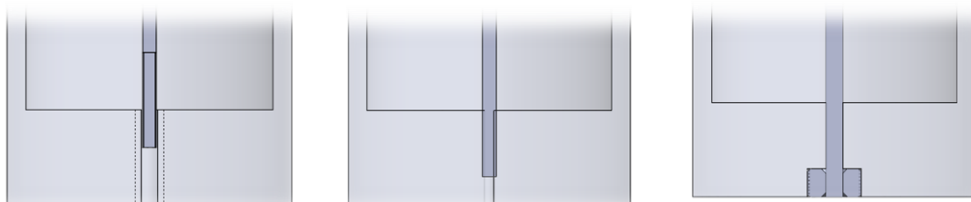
Tapped and threaded pin (a) interference fit pin (b) bolted pin with nut (c)
